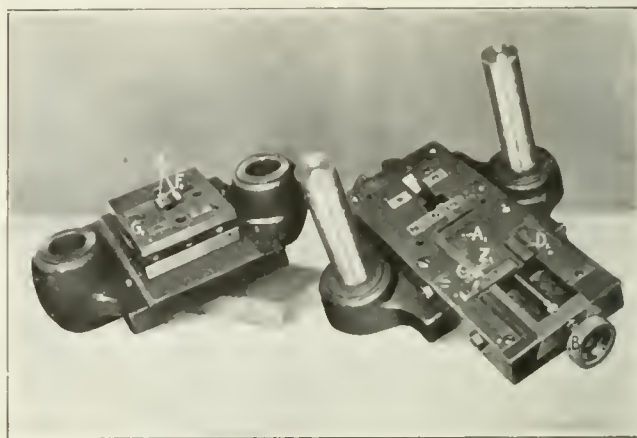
Adjustable Die for Trimming Cam Levers to Length
